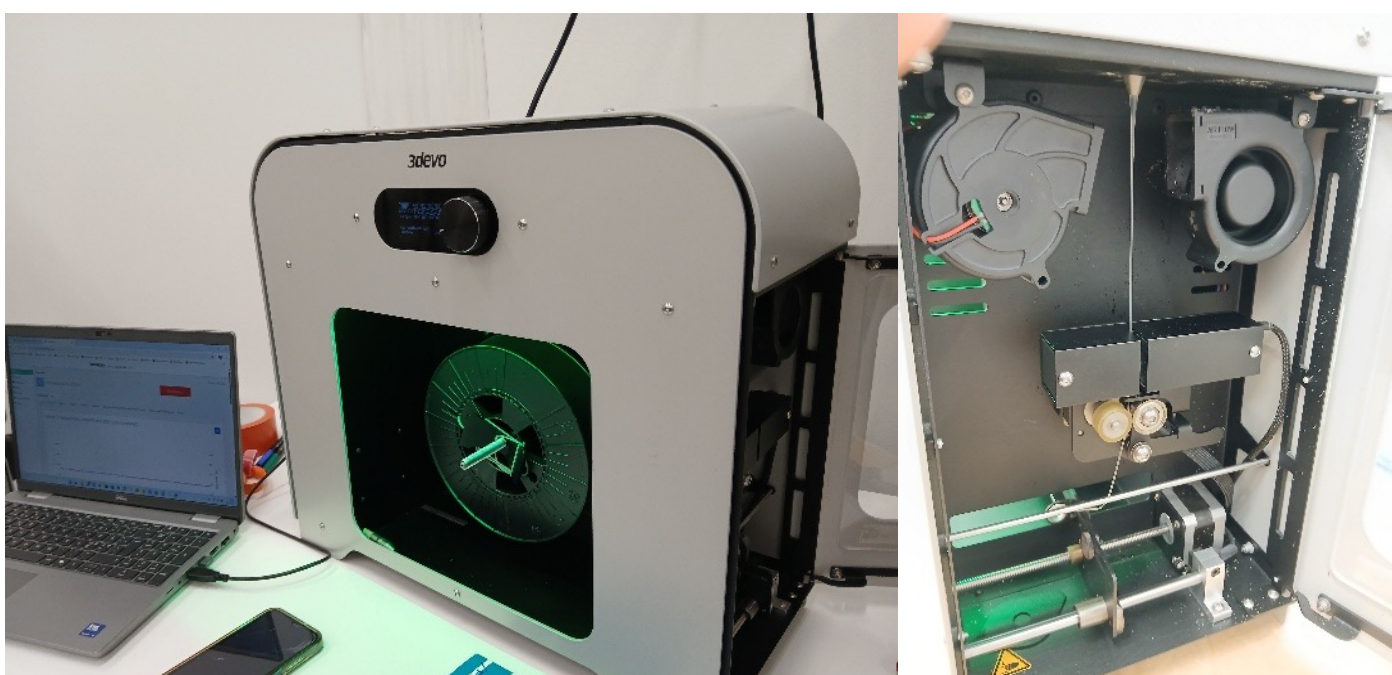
A filament extruder for making 3D printing filaments. (Image Kusti Ruokamo)
